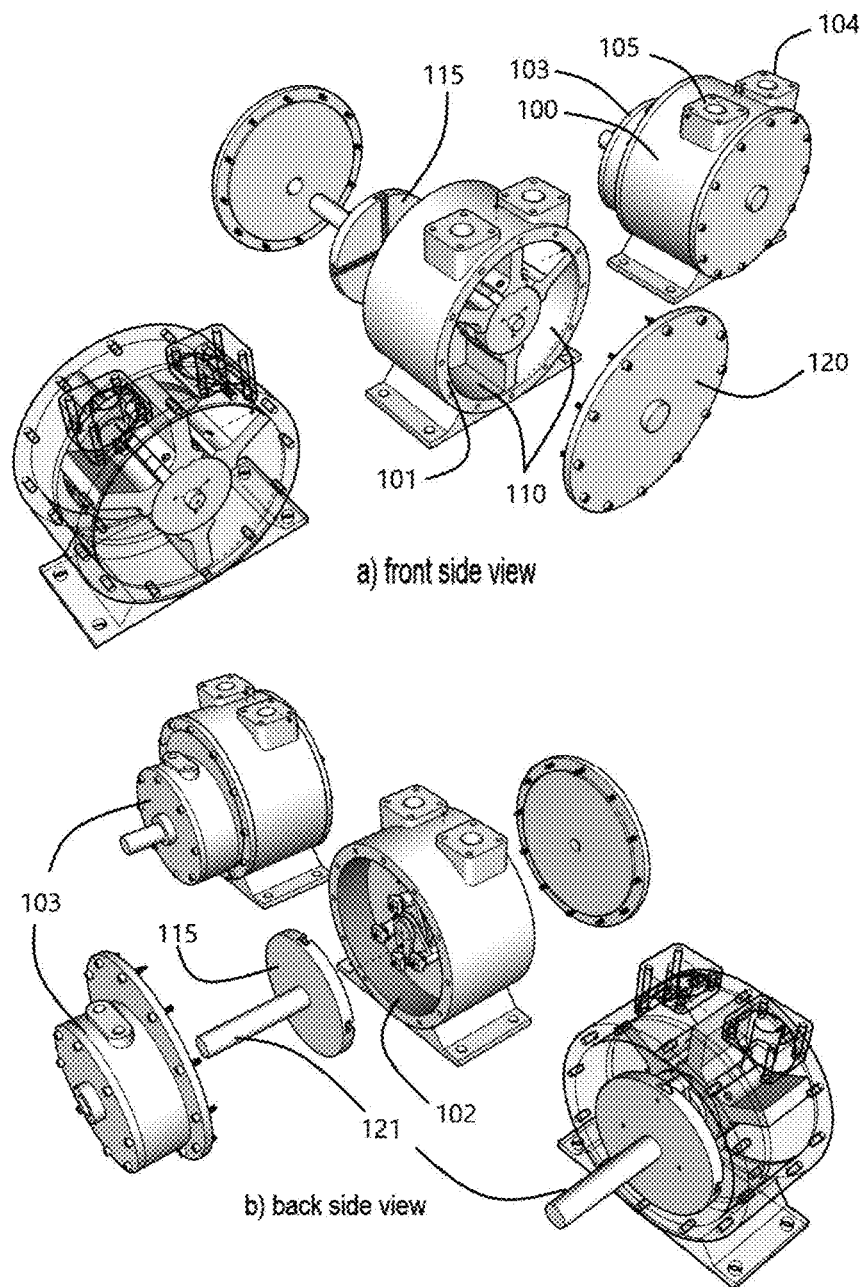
coaxial radial vane type engine, a) front side view b) back side view.
